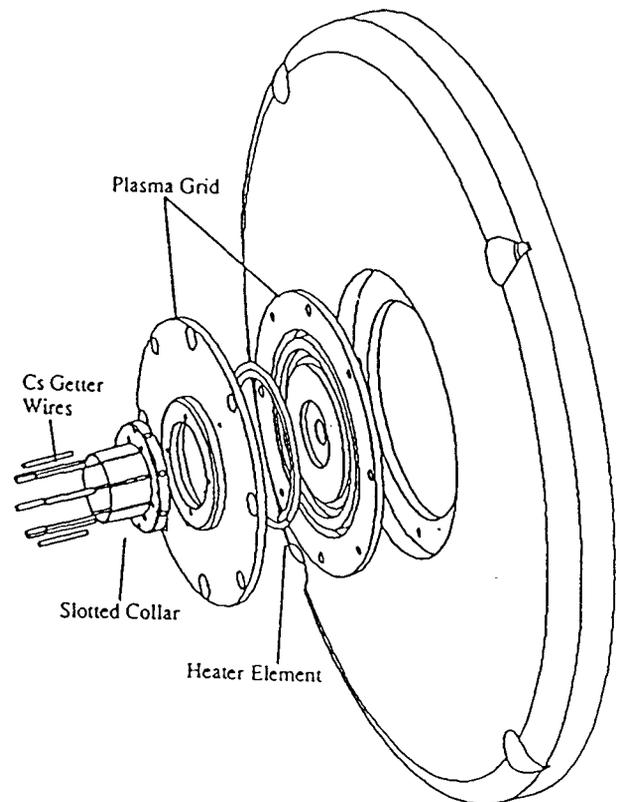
Exploded view of collar area with eight getter wires and grid heater.
